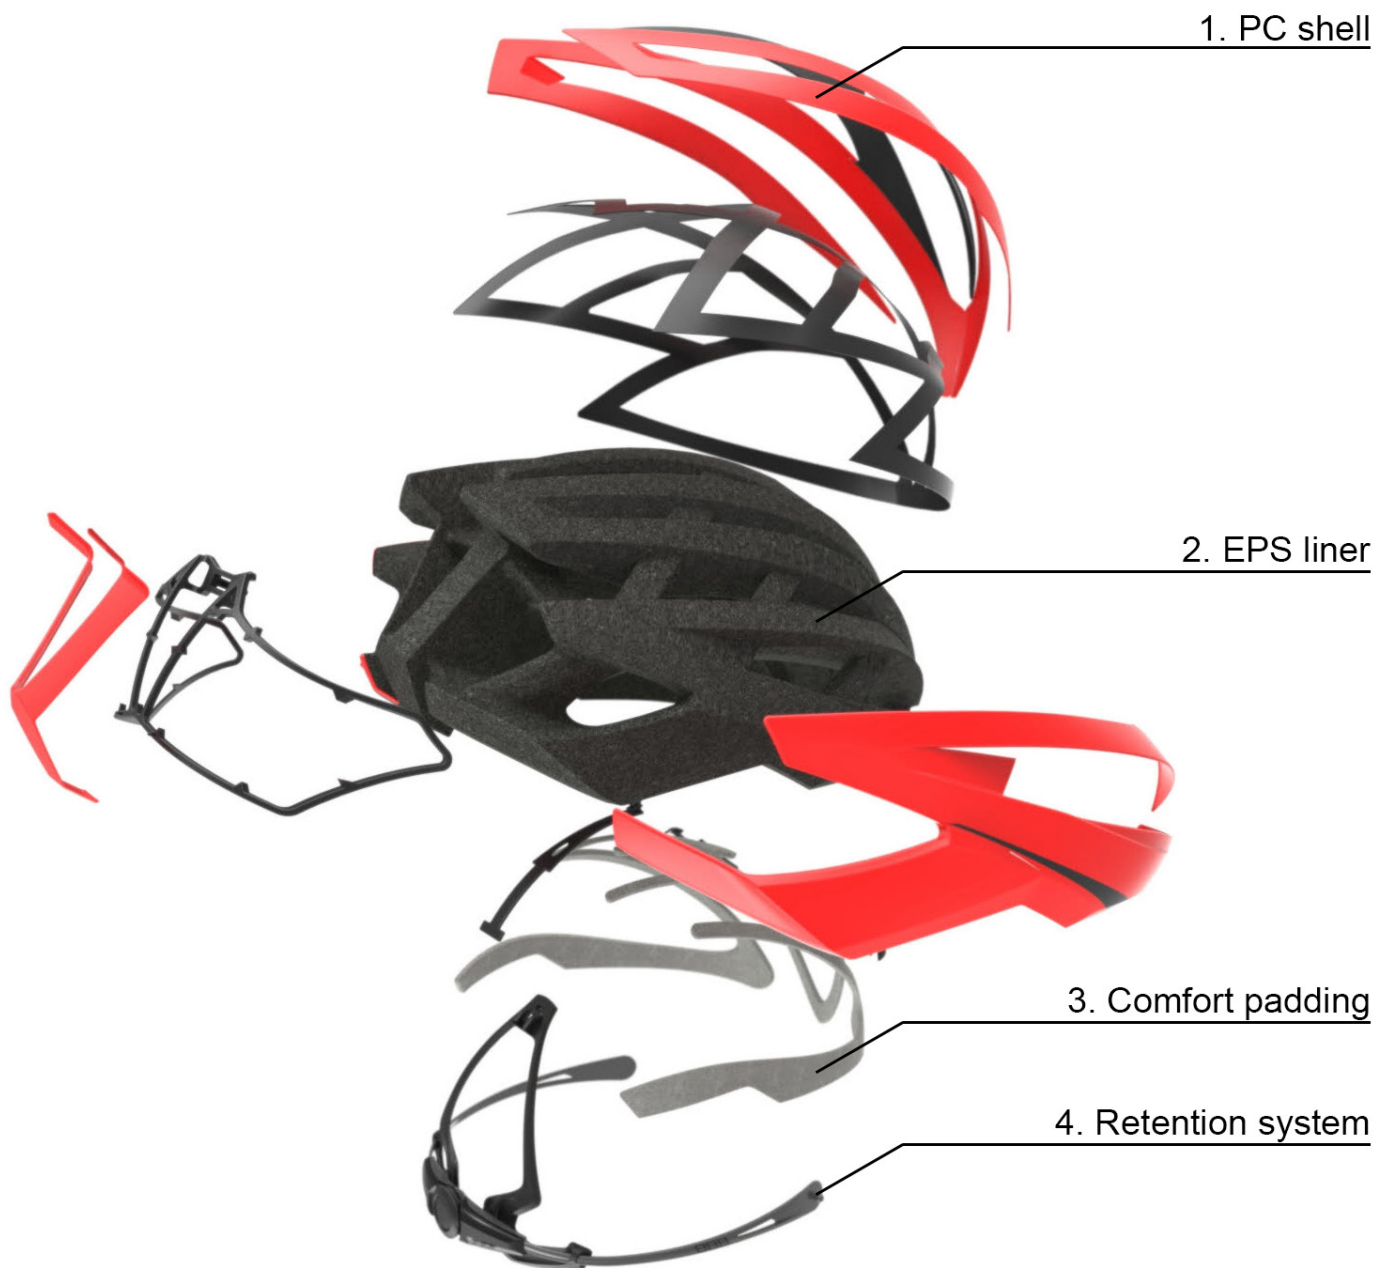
An exploded view of the BBB Icarus, showing the different parts and how they relate.
